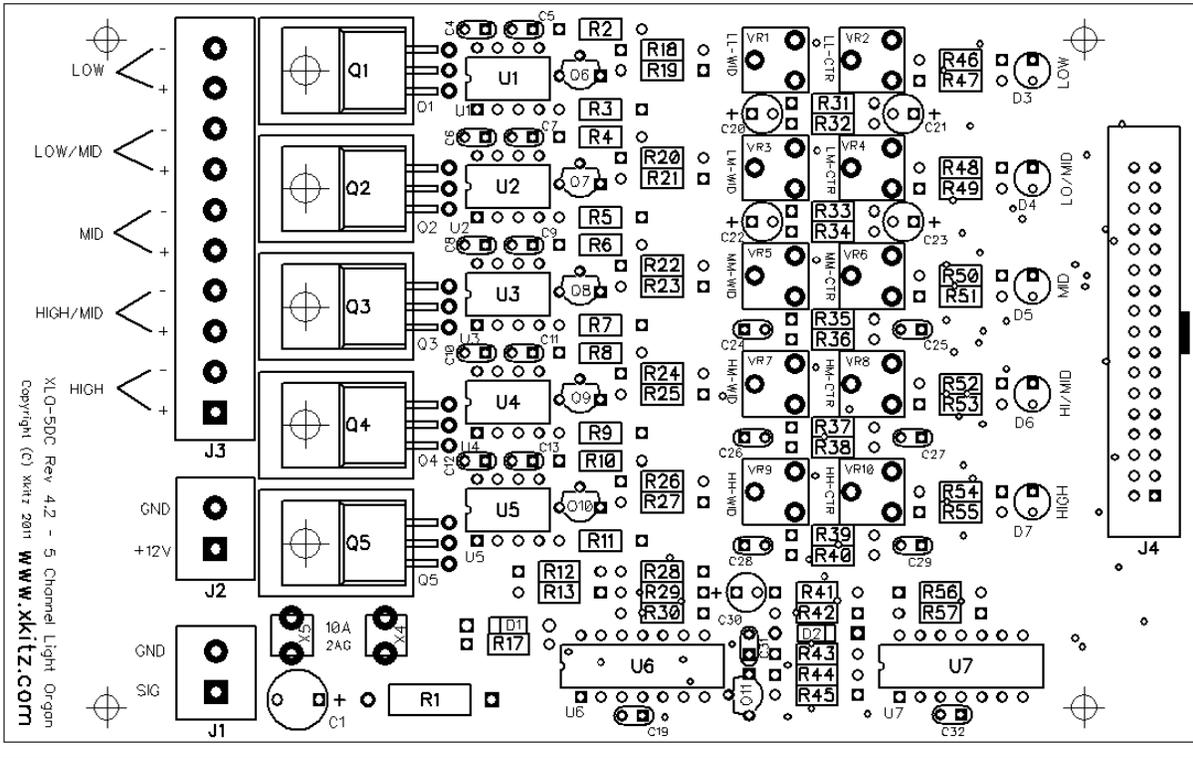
Main Controller PCB Component Placement (PCB dimensions: 5.75" x 3.5")
